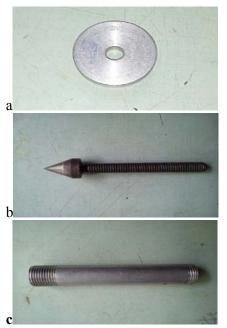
Fabrication of Aluminum vortex tube parameters:(a)diameter orifices and (b) the control valve (c) the hot tube.
